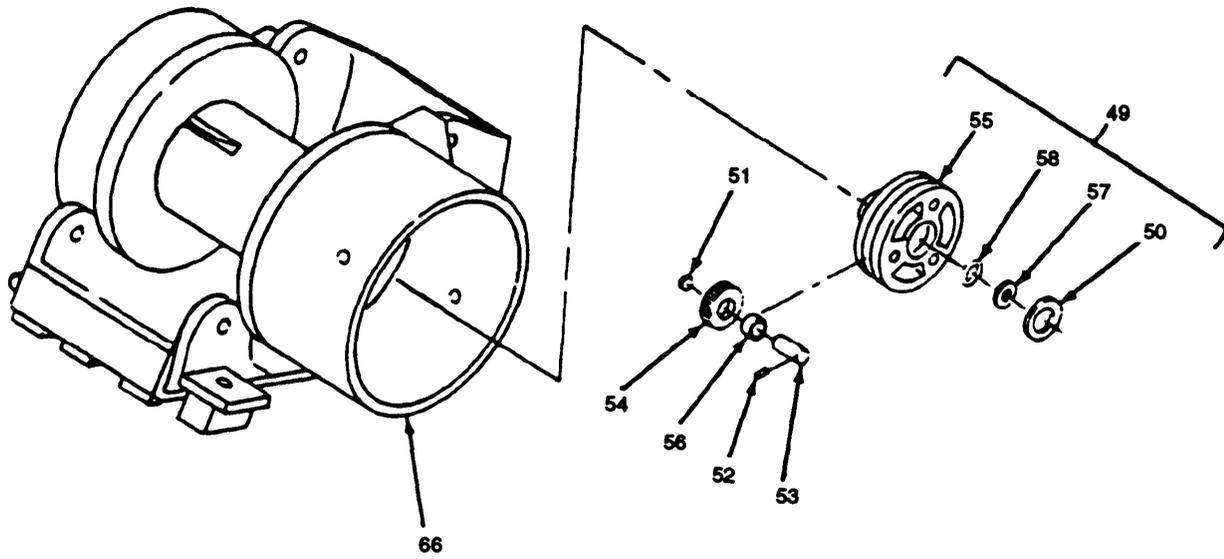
Winch Assembly Model 11-S-EC, Reassembly (Sheet 3 of 10).
